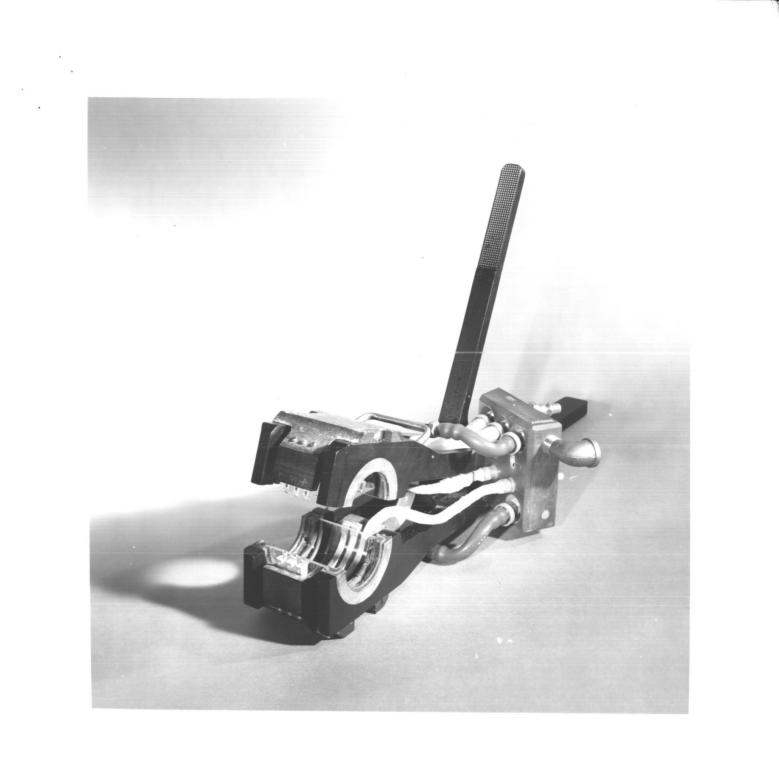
1 1/2" BRAZE TOOL FOR ELBOW & TEE FITTINGS MOL761
